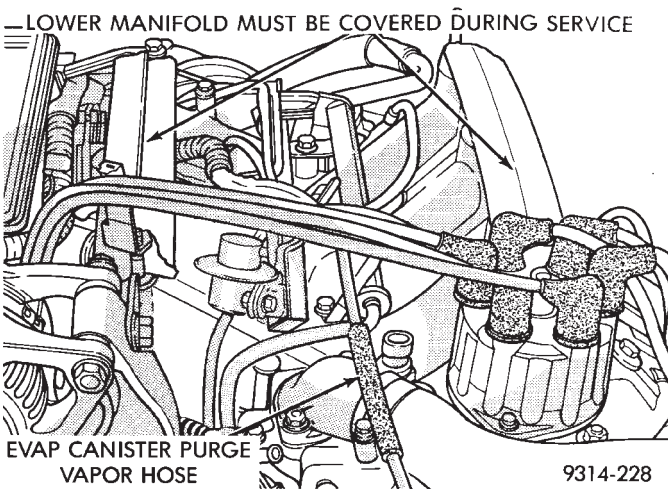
Air Intake Plenum to Intake Manifold Attaching Fasteners
